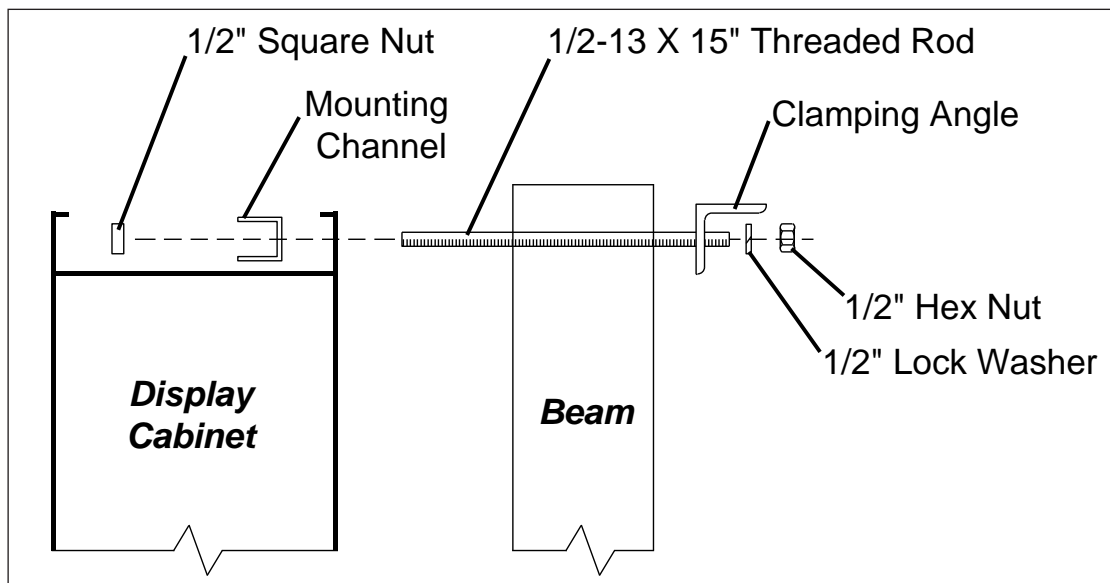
Clamping Angle Mounting (Sheet Metal), Side View
